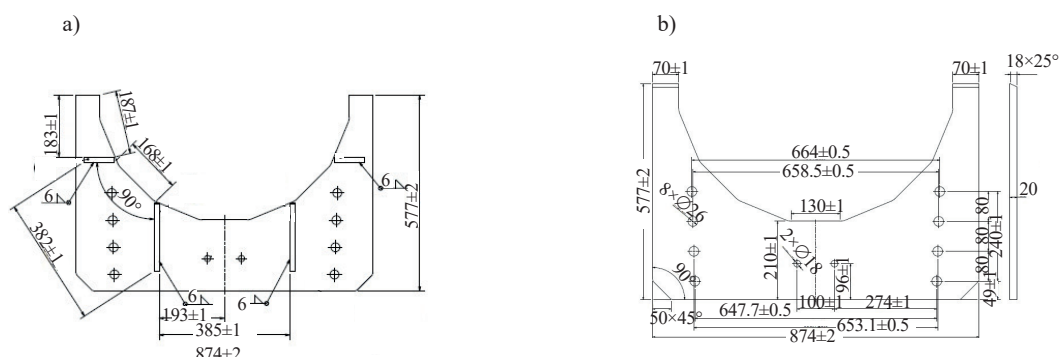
Structural details of tested truss type sockets: a) assembly; b) horizontal stiffener
